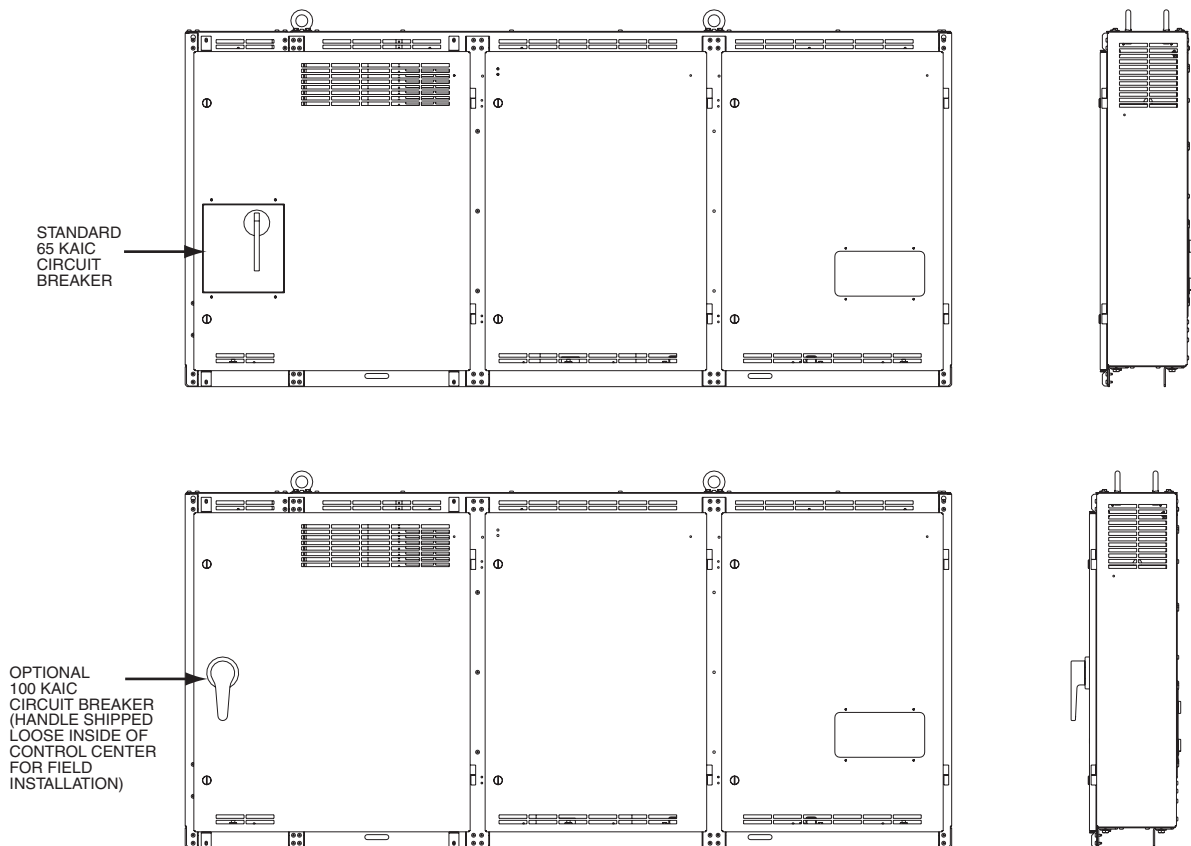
Standard and 100-KAIC Circuit Breaker Control Center (R Compressor Shown)
